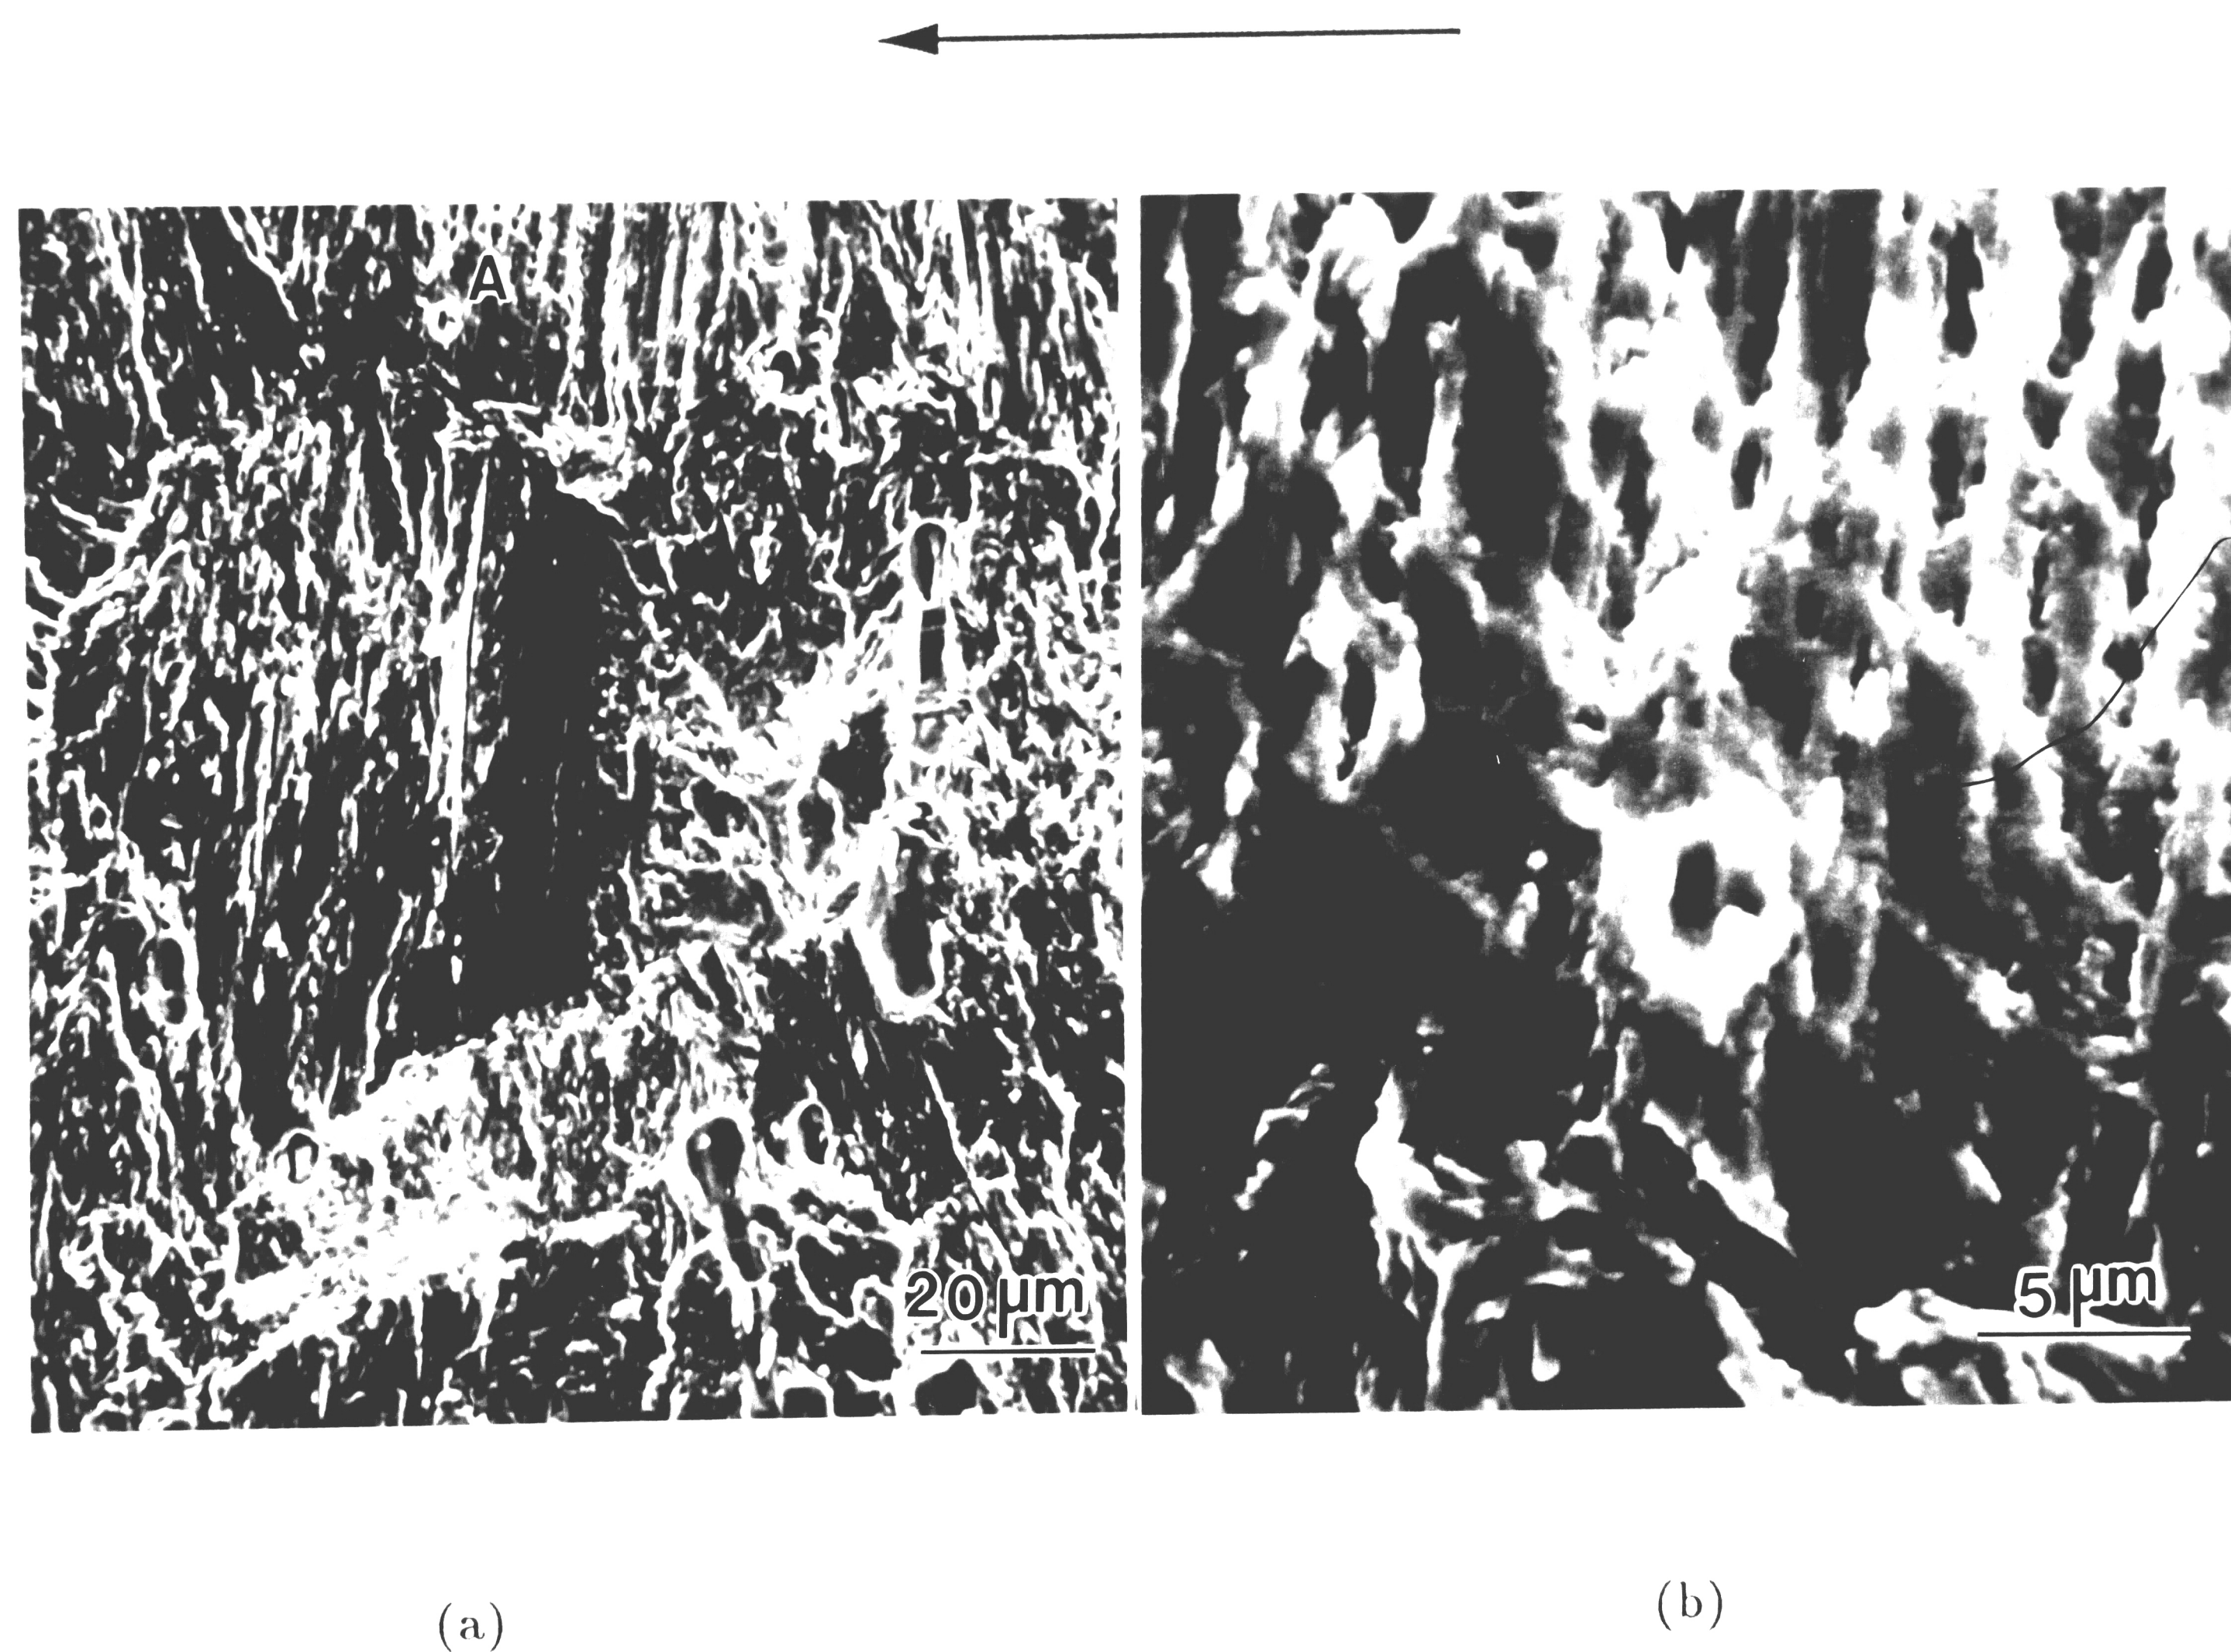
SEM microfractographs of cold-rolled 304 stainless steel tested in vacuum showing the slip traces in (b) as marked by A in (a).
